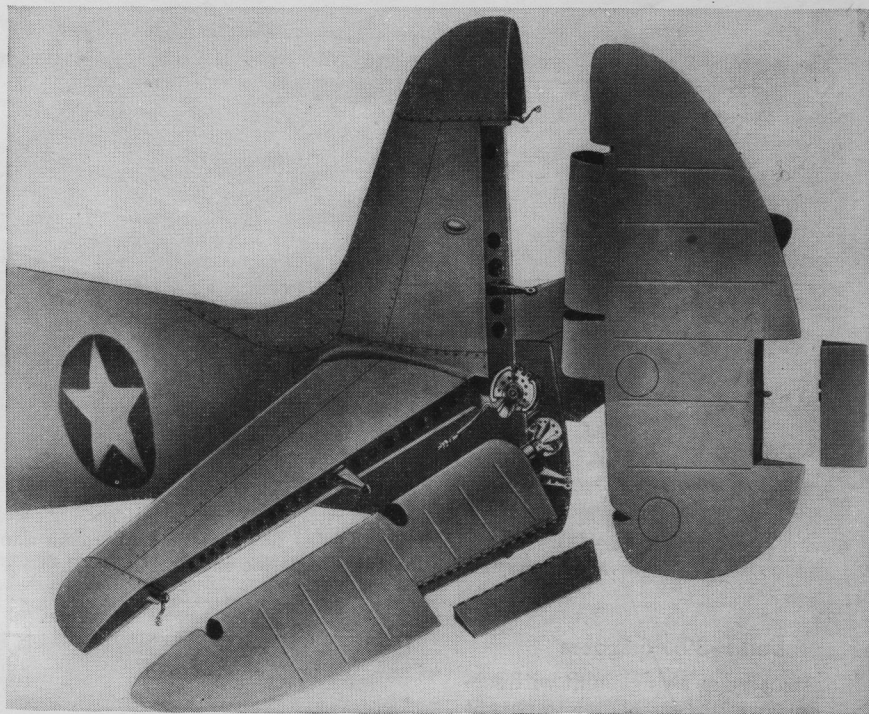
Exploded view of an Airacobra tail, showing the attachment of units and elevator torque tube.
